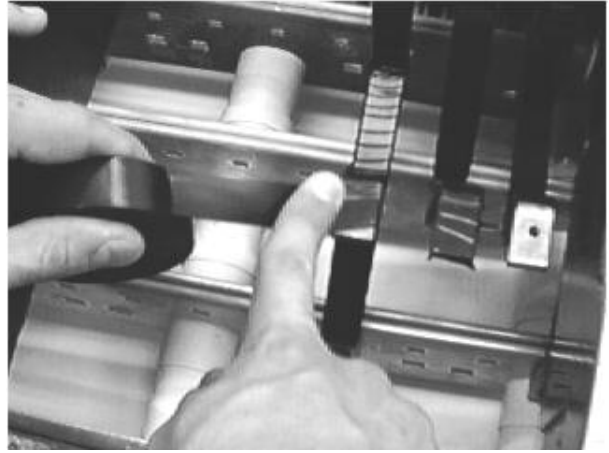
Mounting TQD and THQD circuit breakers into Spectra APNB bolt-on interiors, assembly end view.
